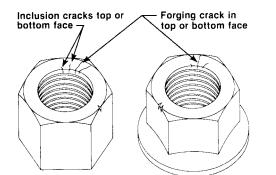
Typical Forging and Inclusion Cracks in Nuts
